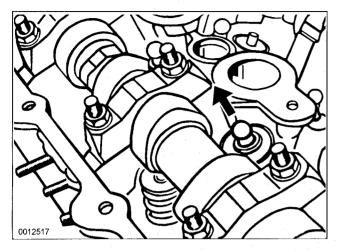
Remove hydraulic valve adjuster by pulling straight out of cylinder head (arrow).
